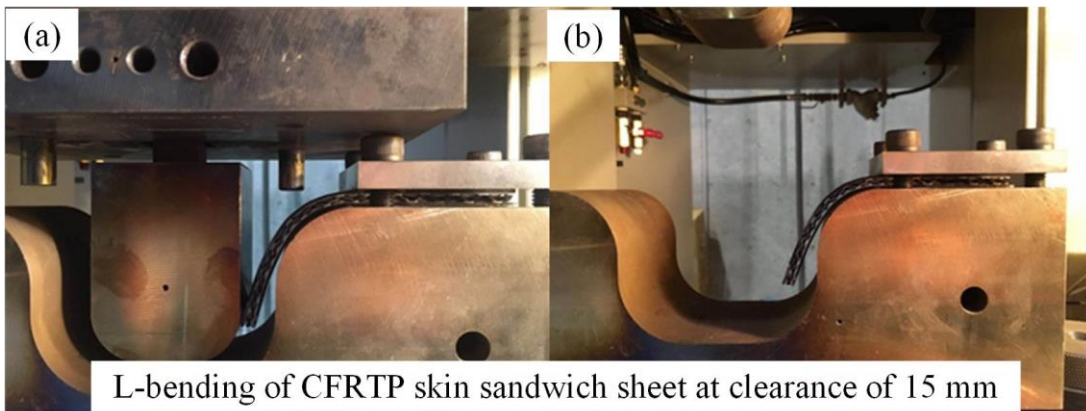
L-bending test of sandwich sheets with CFRTP faces at clearance of 15 mm.
